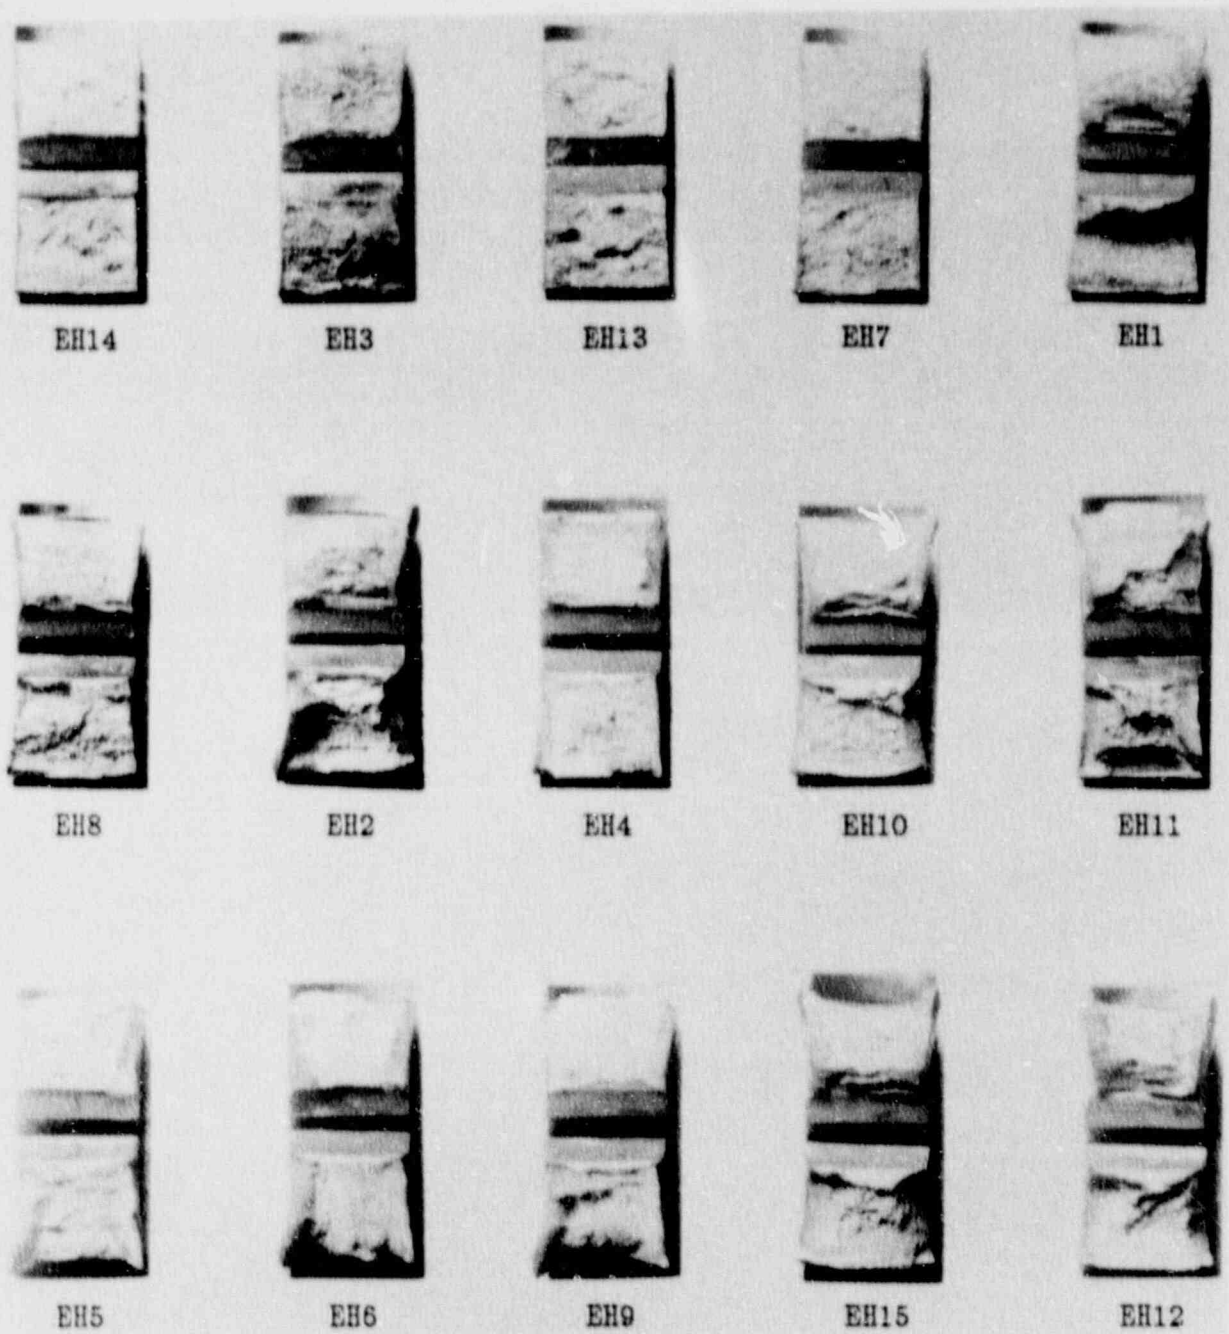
Charpy Impact Specimen Fracture Surfaces for Braidwood Unit 1 Reactor Vessel Weld Metal
